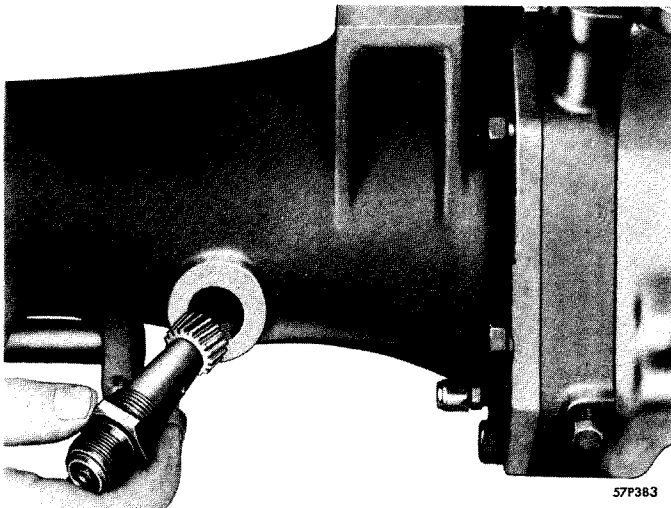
Removal and Installation of Speedometer Drive Pinion Assembly
